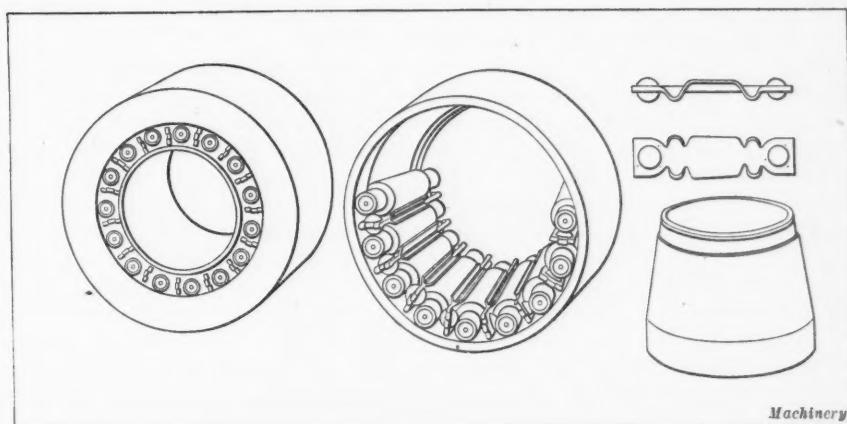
Tapered Roller Bearing with Separator composed of Individual Units placed between Adjacent Rollers
